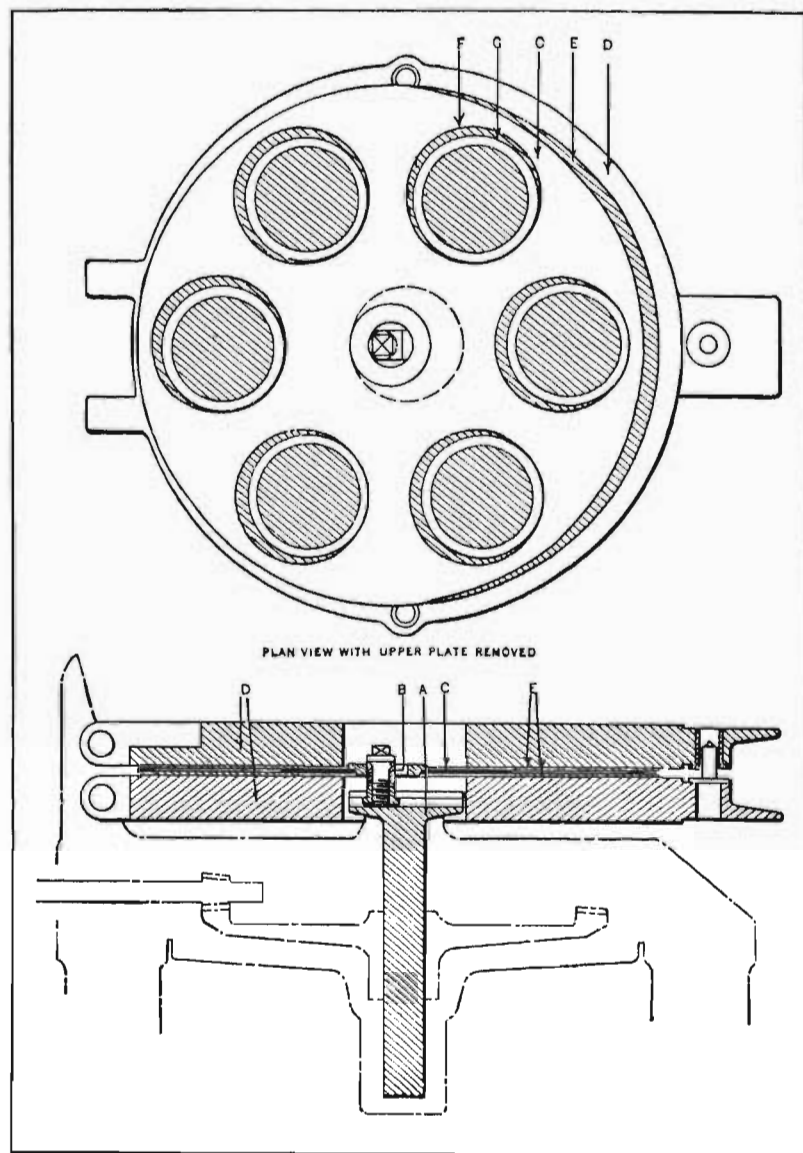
Mechanical Lapping Mechanism for Finishing Small Brass Rings
